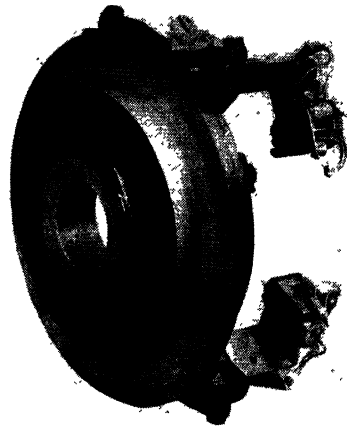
Ball-Bearing Housing with Brush Yoke and Brush Rigging.
